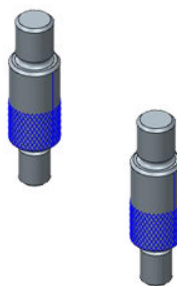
Bolt 3282/29 (1 set = 2 pieces)
